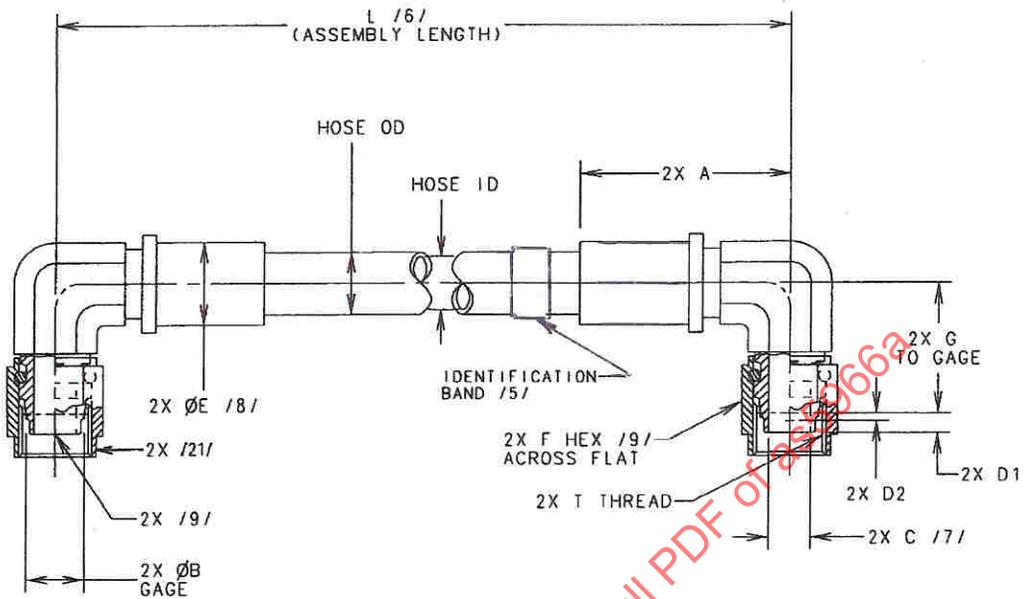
HOSE ASSEMBLY DIMENSIONS
